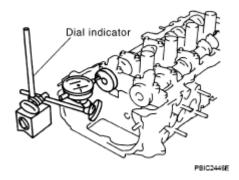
Measuring Camshaft End Play Courtesy of NISSAN MOTOR CO., U.S.A.
